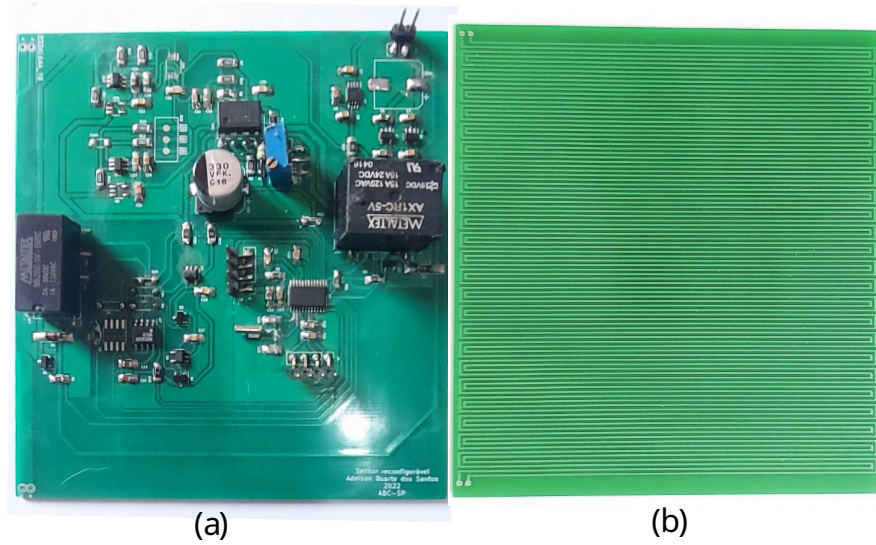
Photograph of the PCB sensor with the signal processing circuits. (a) Top side, with the components soldered. (b) Bottom side, with the reconfigurable sensor.
